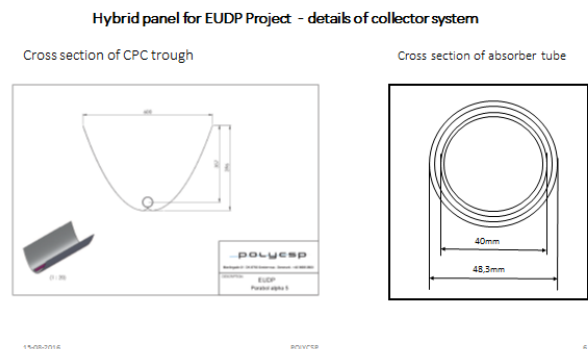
Principal drawing of the CPC reflector and absorber arrangement with cross section of the absorber tube, showing the inner tube creating a thin fluid channel.
